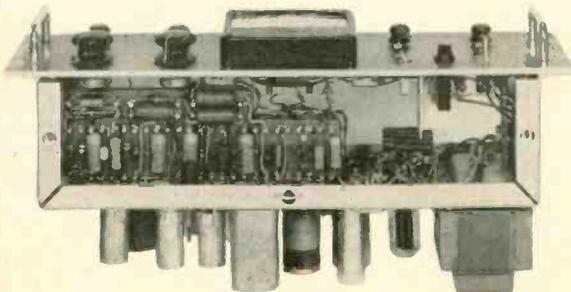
Side view of the amplifier unit with side panels removed shows "dish mounting" with tubes horizontal. Components are board mounted for easy replacement.
